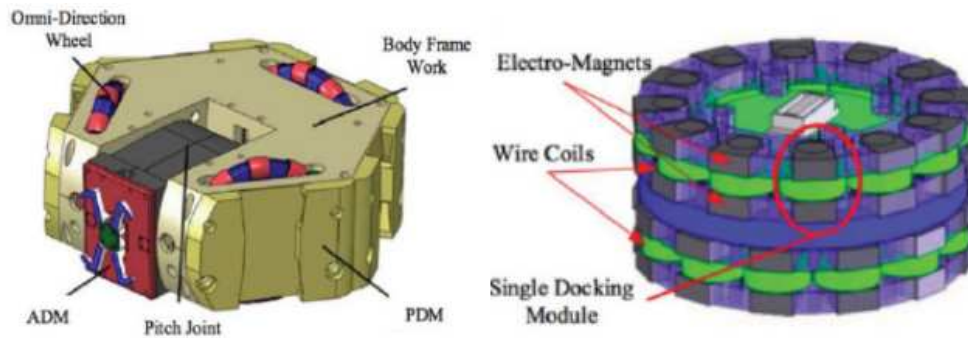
Trimobot platform and coupling mechanism using hook coupling mechanisms [33] (left); a Catmos module with magnetic coupling mechanisms [34] (right).
